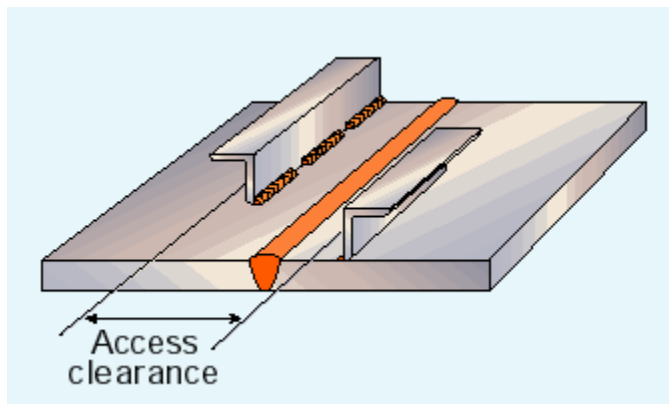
Longitudinal stiffeners prevent bowing in butt welded thin plate joints
